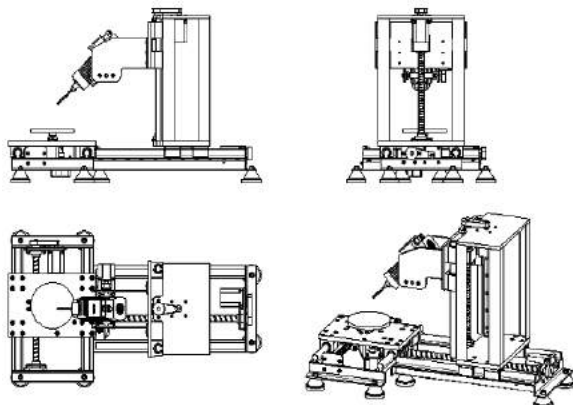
Front, Top, Side, and Isometric view of the Machine
